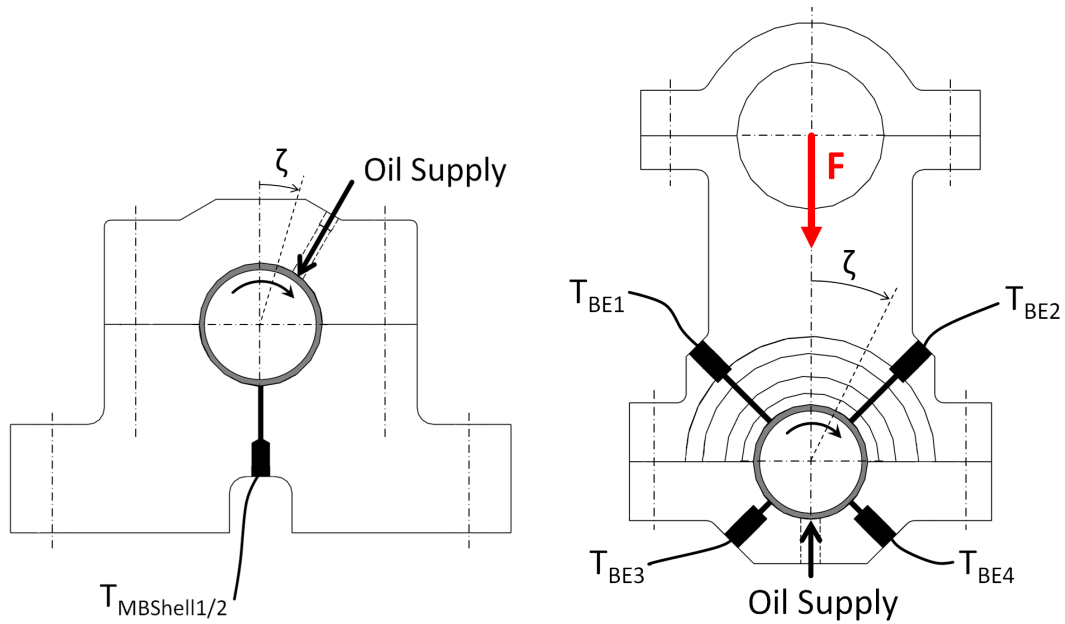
Temperature measurement positions in the support bearings (left) and the test bearing (right)
